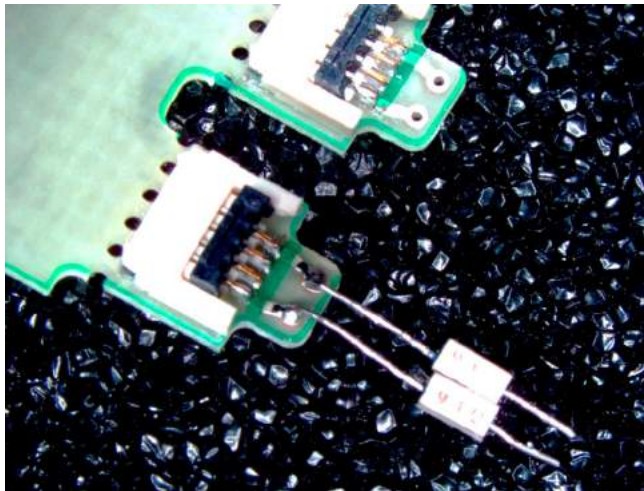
Solder Fillets Surrounding the Resistor Lead Wires
